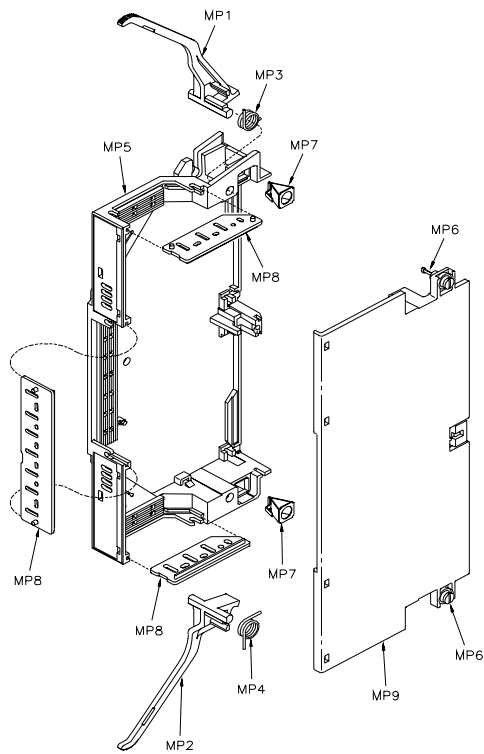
HP E1415A/E1419A Terminal Case Parts
